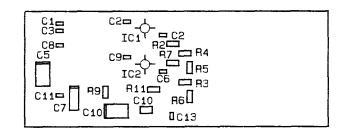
Oscillator Module - 2nd Local Oscillator VCO Board - Side B layout
